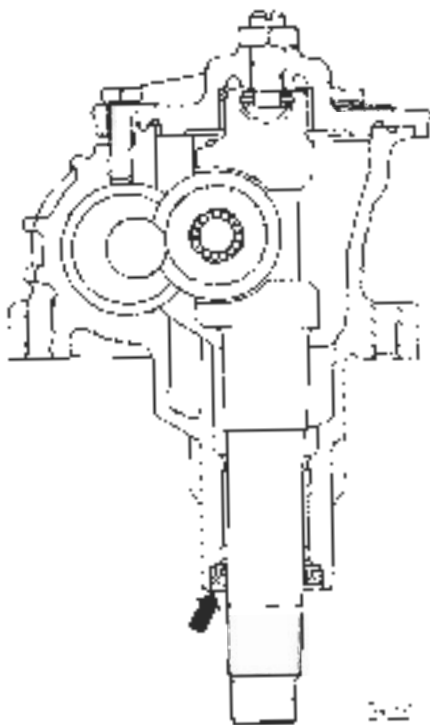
Roller shaft oil seal (located on roller shaft) steering gearbox.
